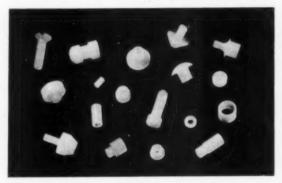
Above — Tiny nylon parts for electrical equipment, easily machined on automatic screw machines
